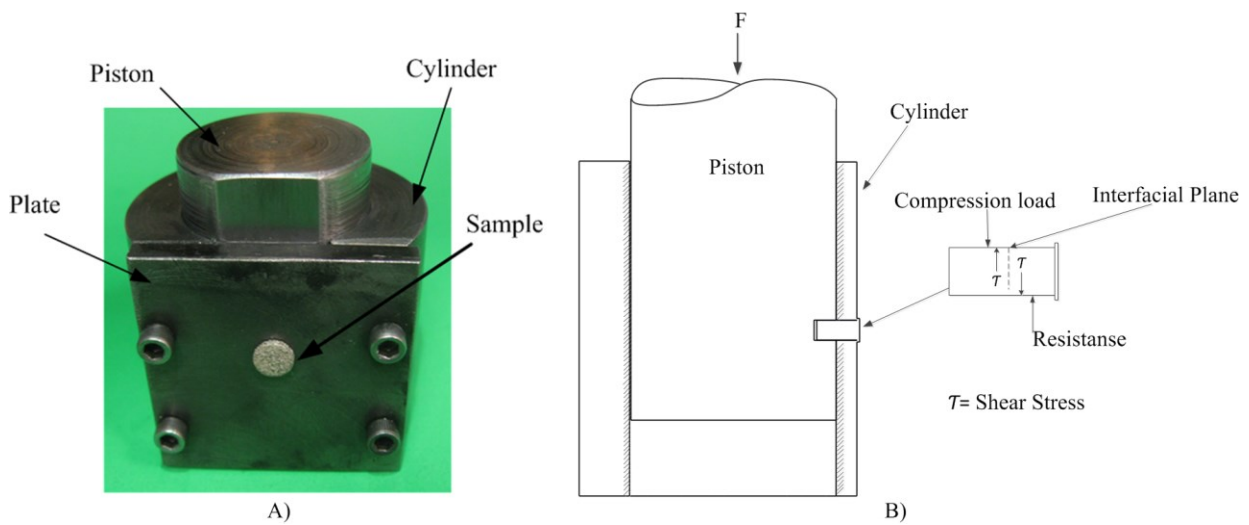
Shear test apparatus: A) fixture comprised of a fixed part (cylinder) attached to the plate holds the sample and a moving part (piston), B) schematic of the loading force on the sample that generates a shear force at the interfacial plane.
